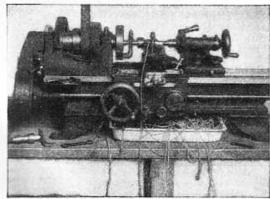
11-inch Standard Change Gear Lathe Manufacturing Small Parts
